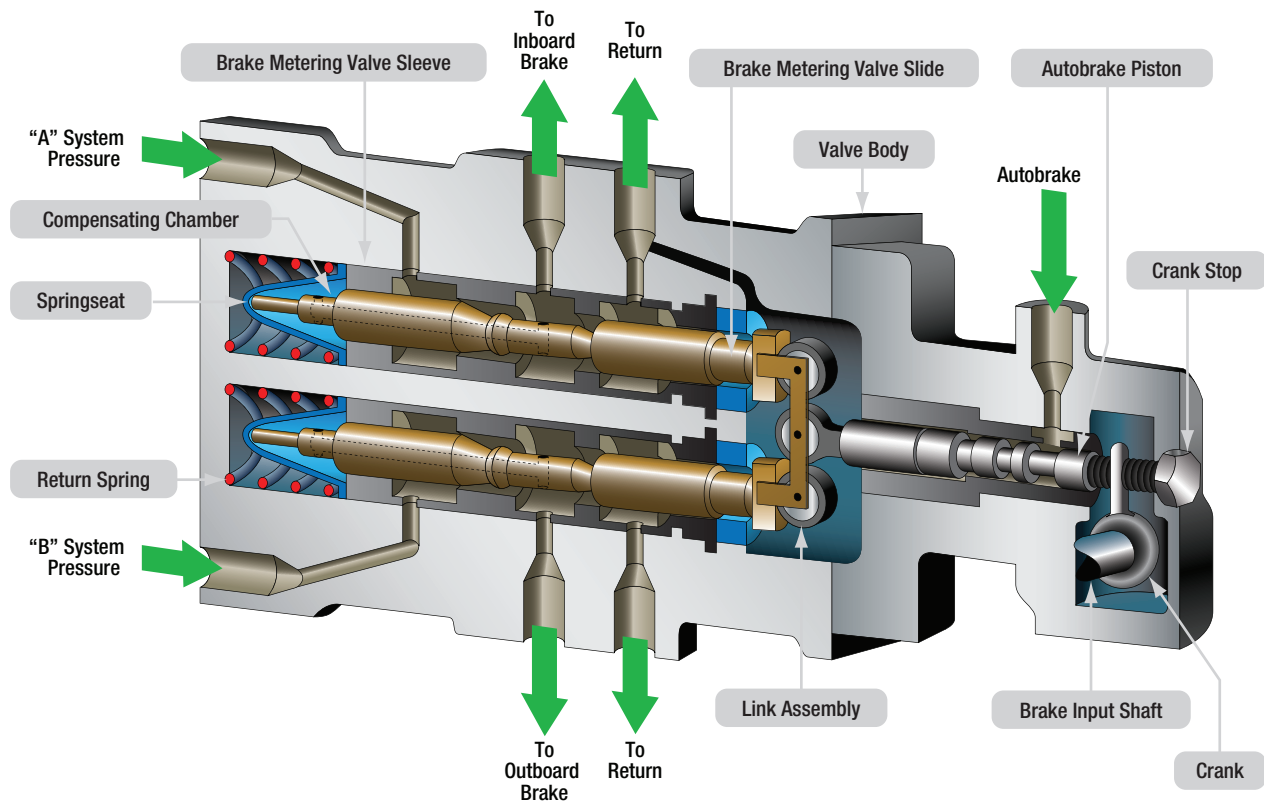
A brake metering valve from a Boeing 737. A machined slide or spool moves laterally to admit the correct amount of hydraulic system fluid to the brakes. The pressure developed is in proportion to the amount the rudder/brake pedal is depressed and the amount the slide is displaced. The slide/spool also simultaneously controls the return of fluid to the hydraulic system return manifold when brake pressure is released.
